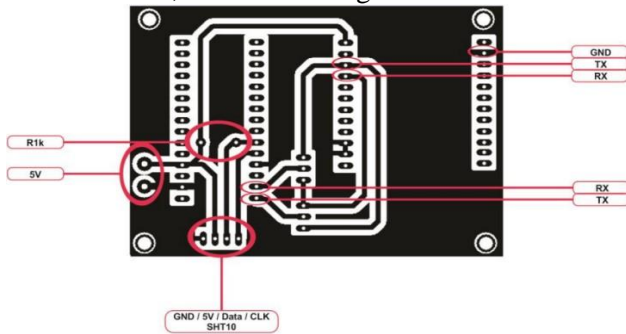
Printed circuit board for the irrigation control module (The authors)
